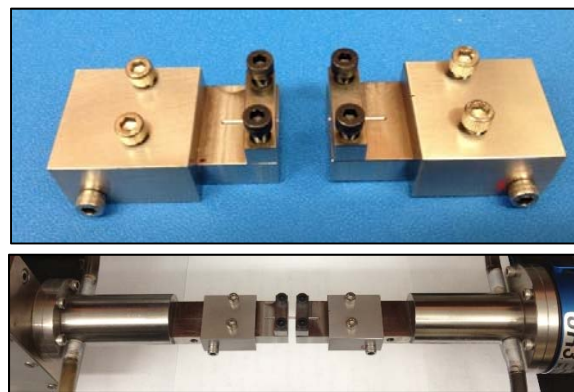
Fixtures with V-grooves used to grip the samples.
